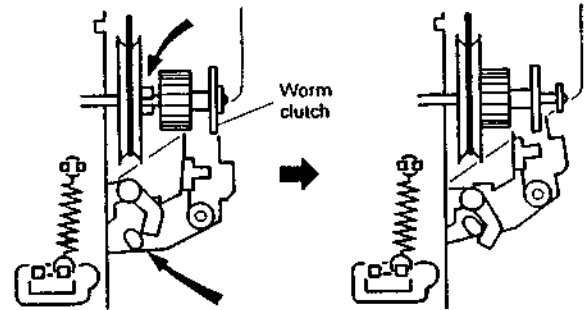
(a) Not locked Fig. 1-1-8(b) Lock engaged
